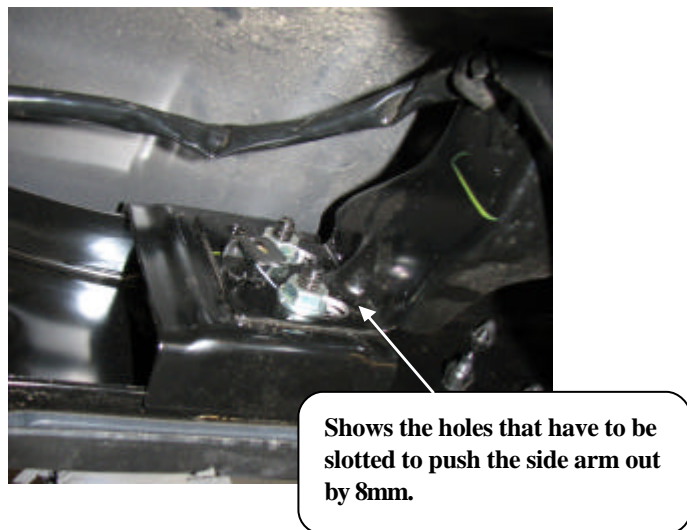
Passenger side arm of bumper step which has to be moved out using a packer.
